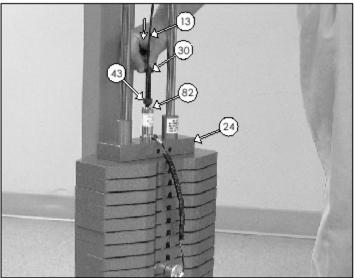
Connect the Cable (#13) to the Top Plate Selector Bar (#24) by threading the Finished Hex Nut 1/2-13 (#43) and inserting a Split Lock Washer 1/2" (#82) to the Cable Hex Tap Bolt 1/2-13 X 3 1/2 (#30). Then, thread the Cable Hex Tap Bolt 1/2-13 X 3 1/2 (#30) to the threaded socket of the Top Plate Selector Bar (#24).
